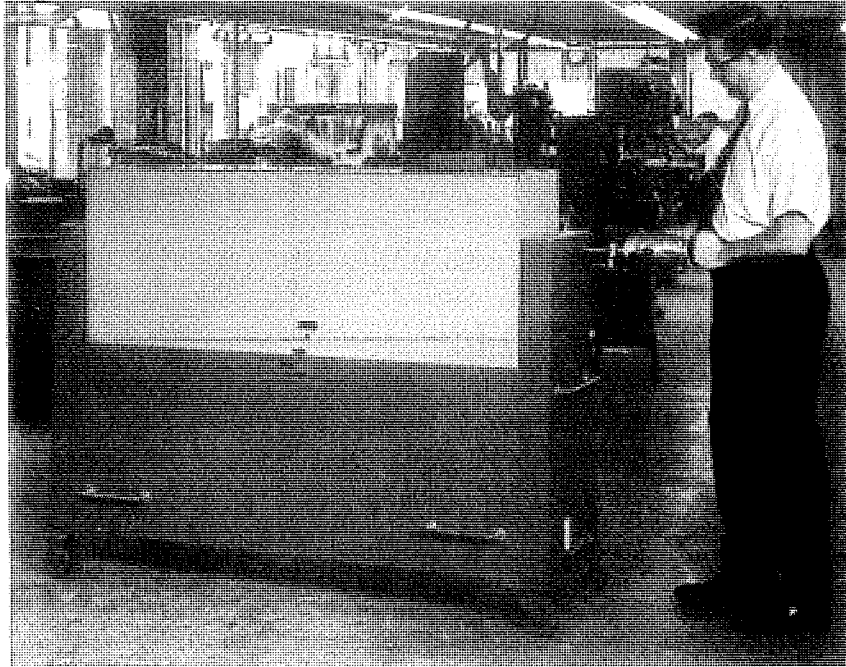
Shows power tool attachment for raising and lowering machine.
